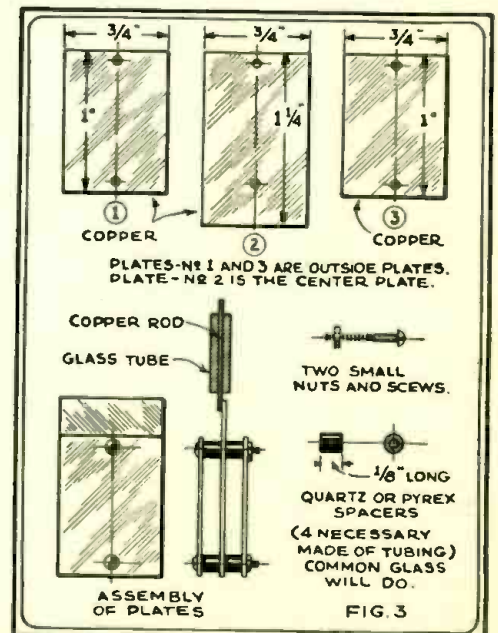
Kerr Cell as finally developed and used by Mr. Brown: large holes in center plate pass the screws without touching.
